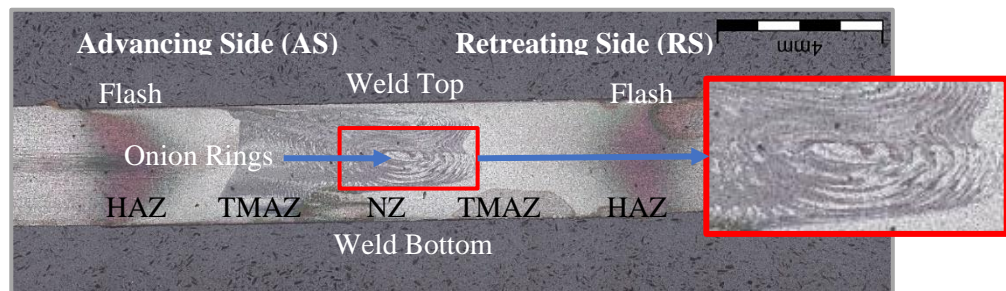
Tool 2 macrograph of “Weld 2.2”
